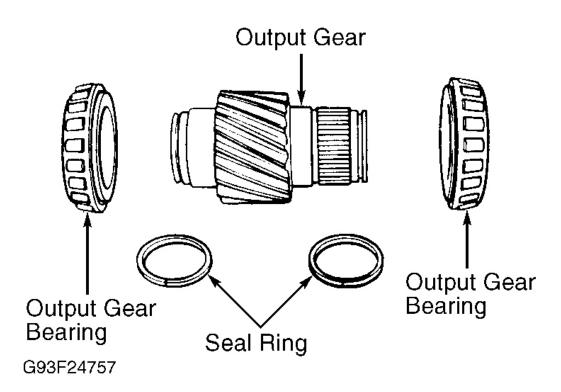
Exploded View Of Output Gear Assembly Courtesy of MAZDA MOTORS CORP.
